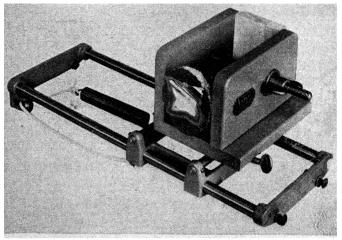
A saw carriage and vise with cross-feed adjustment may be used in building a sawing outfit. (Courtesy of Vreeland Lapidary Manufacturing Company, Portland, Ore.)
